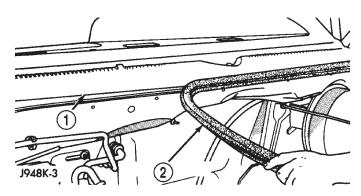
Cowl Plenum Cover/Grille Panel Weatherstrip
